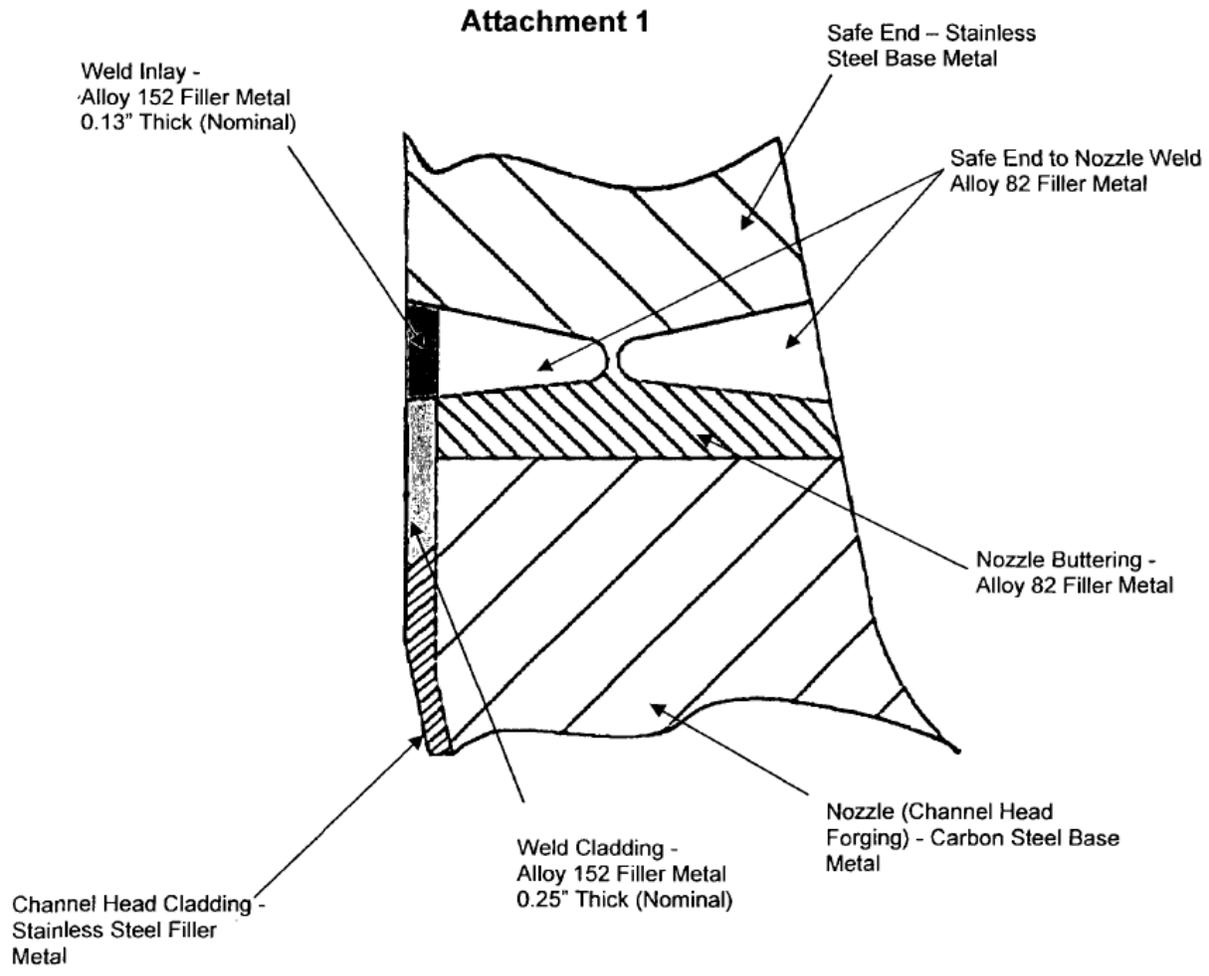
V.C. Summer, Unit 1 Replacement Steam Generator Primary Inlet/Outlet Nozzle to Safe End Weld Design
